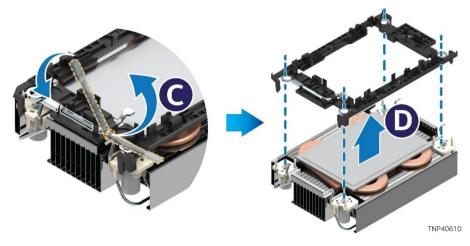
Processor Carrier Clip Removal from PHM Assembly
